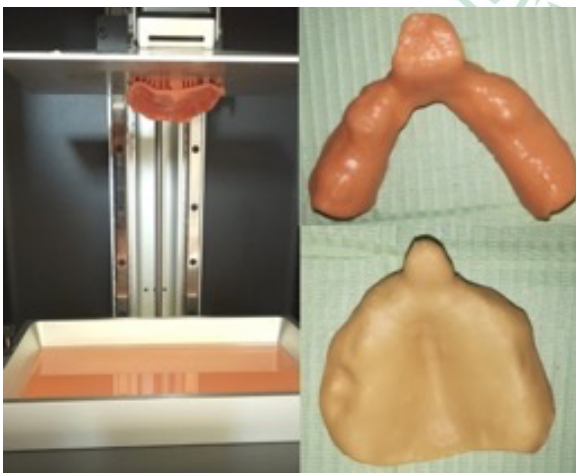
Upper and Lower printed custom trays by additive layering technique
